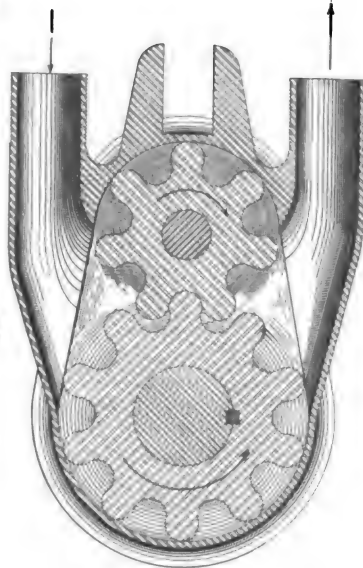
SECTIONS OF FLUID MOTOR ON CAR AXLE.
